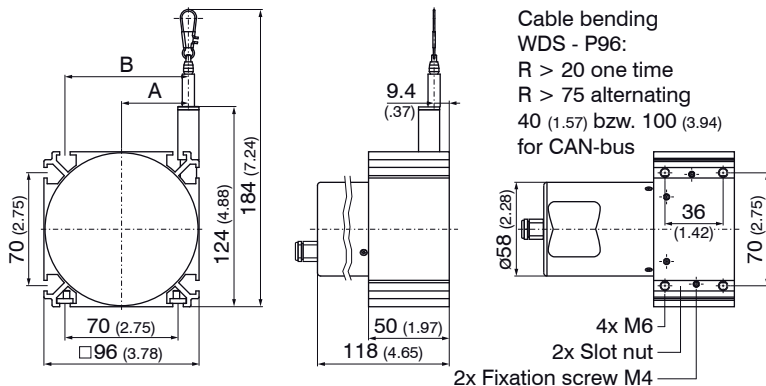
Dimensional drawing WDS- ... - P96 - CA - P, dimensions in mm (inches), not to scale
